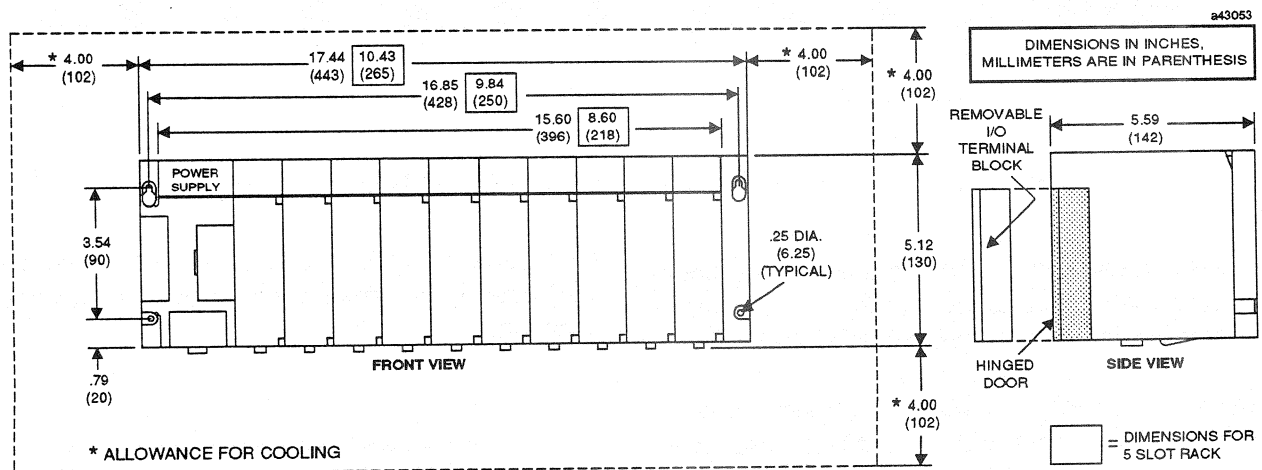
Model 311 Baseplate Mounting Dimensions and Spacing Requirements
